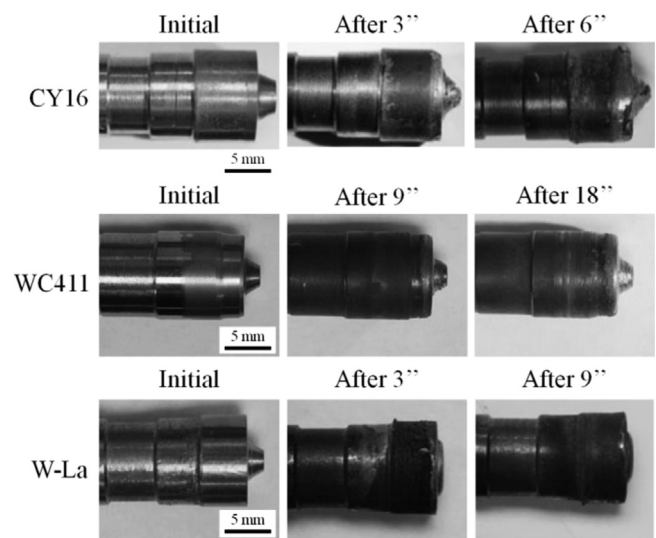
Appearance of the tools after different welding lengths. Note that the total length of accumulative welds is different for the three different tools.
